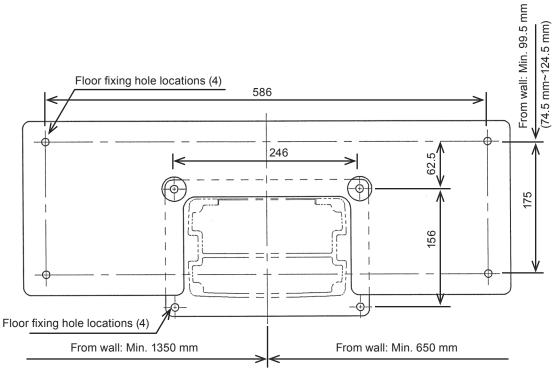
79: Floor fixing hole locations (cephalometric)
